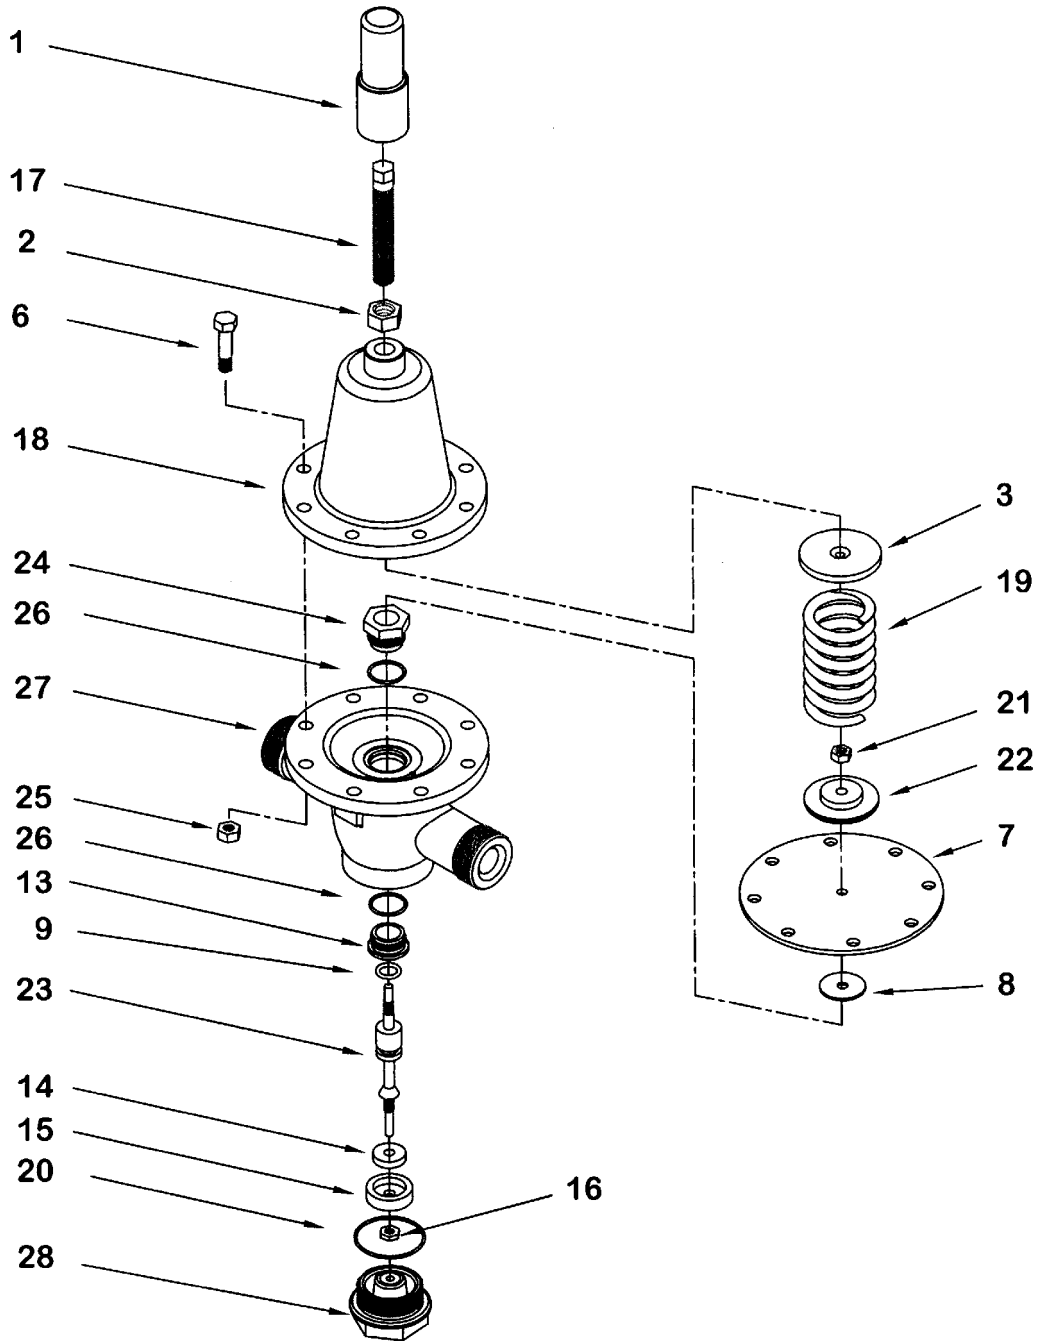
EXPLODED VIEW – TYPICAL 1/2" THROUGH 1-1/2" VALVE ASSEMBLY
